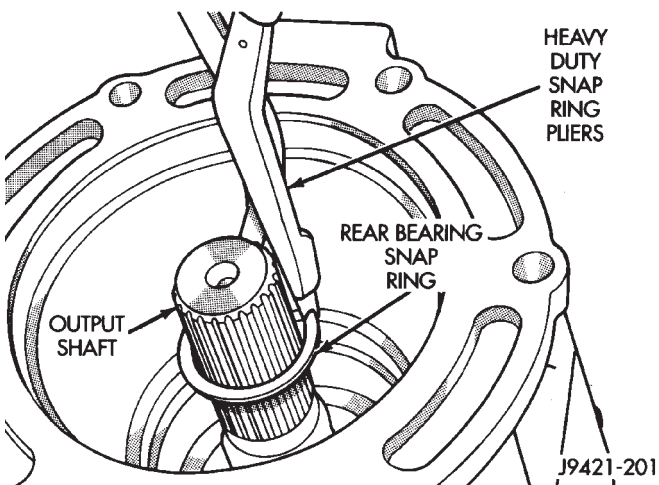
Installing Rear Bearing Snap Ring—4WD
